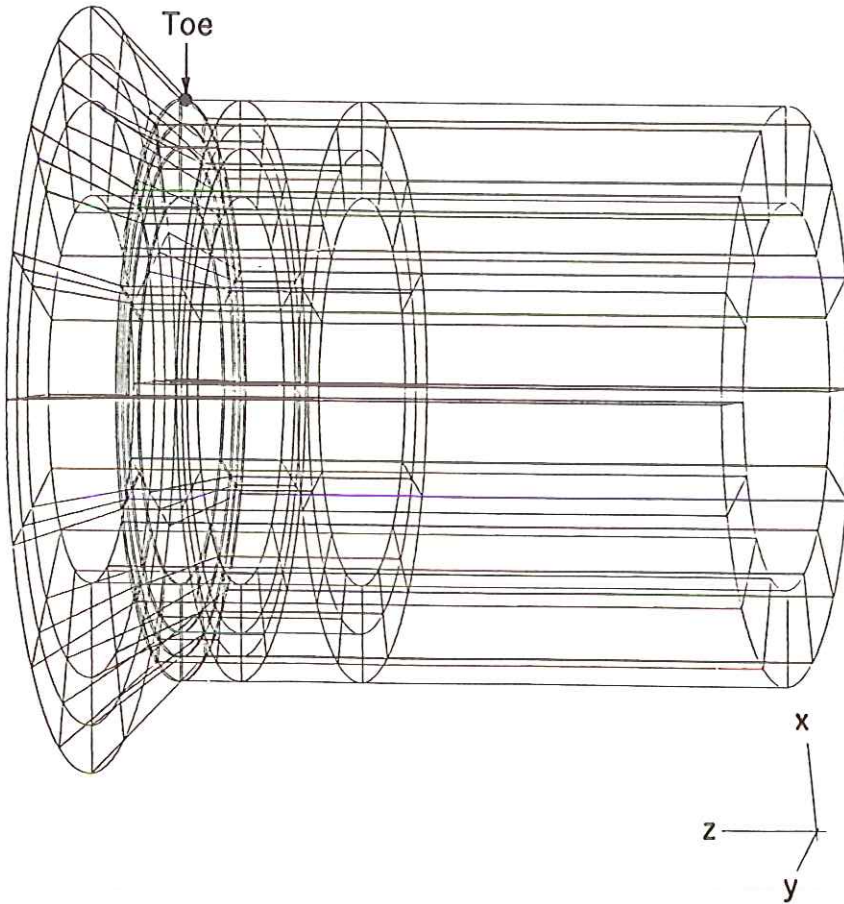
Finite element mesh of tube-to-plate welds (ratio of notch-root element size to notch radius = 1:4). The weld toe of interest is located at the intersection of the cone with the hollow cylinder
